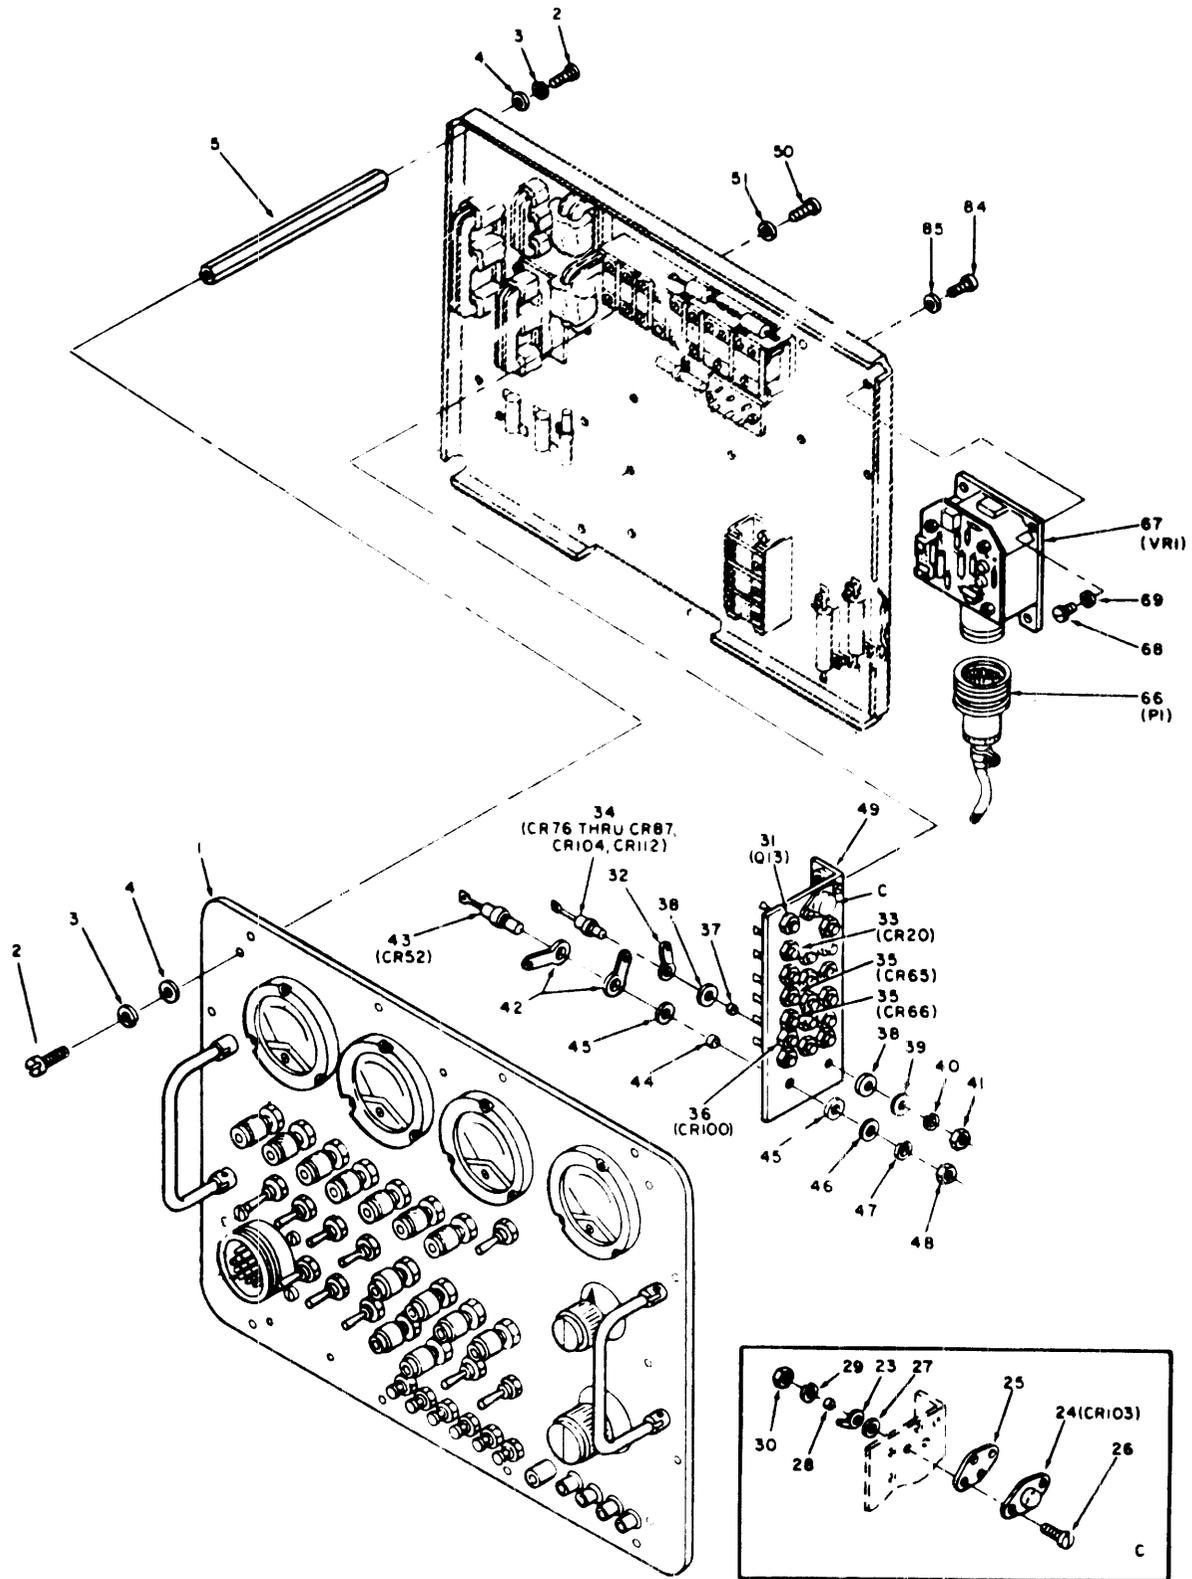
Electrical Components Assembly Exploded View (Sheet 1 of 2)
